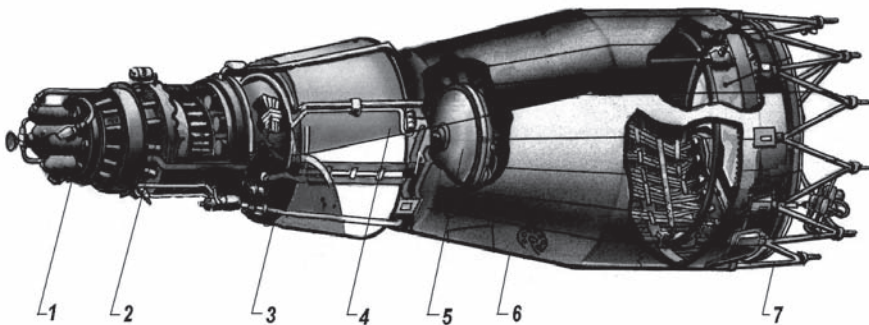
The TOPAZ NPS layout: (1) caesium vapour supply system and control drum drive unit, (2) thermionic reactor converter, (3) liquid metal circuit pipeline, (4) reactor shielding, (5) liquid metal circuit expansion tank, (6) radiator, (7) frame structure. Source: Kurchatov Institute.
